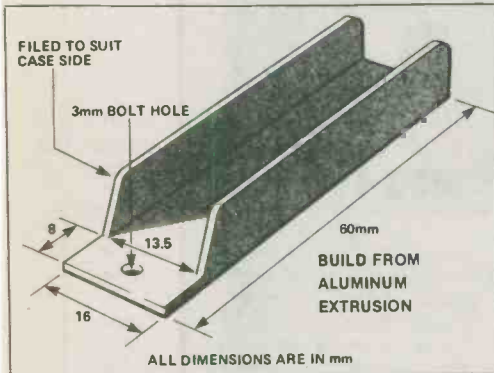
Details for the aluminum extrusion that houses the photoprobe.
